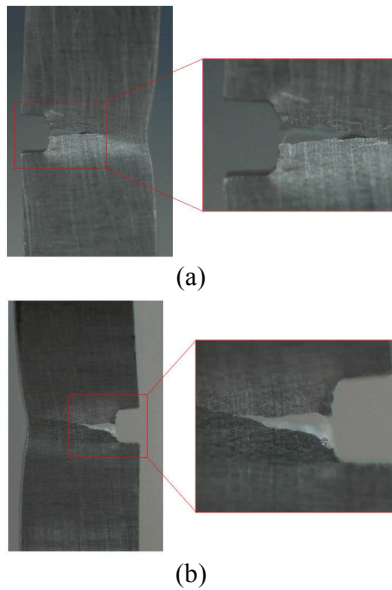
The second step of crack growth test: (a) front side and (b) back side of specimen
